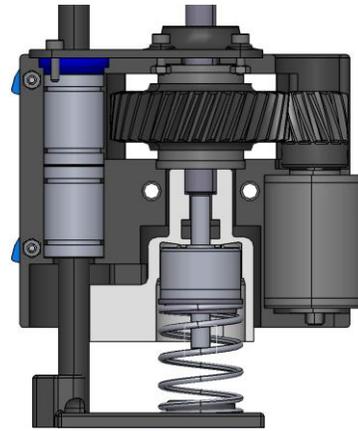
Crosssection of the Pressure Unit, showing the rod guided by linear bearings (left) and a load cell connected to a trapezoidal rod (middle) being turned by the stepper motor (right).
